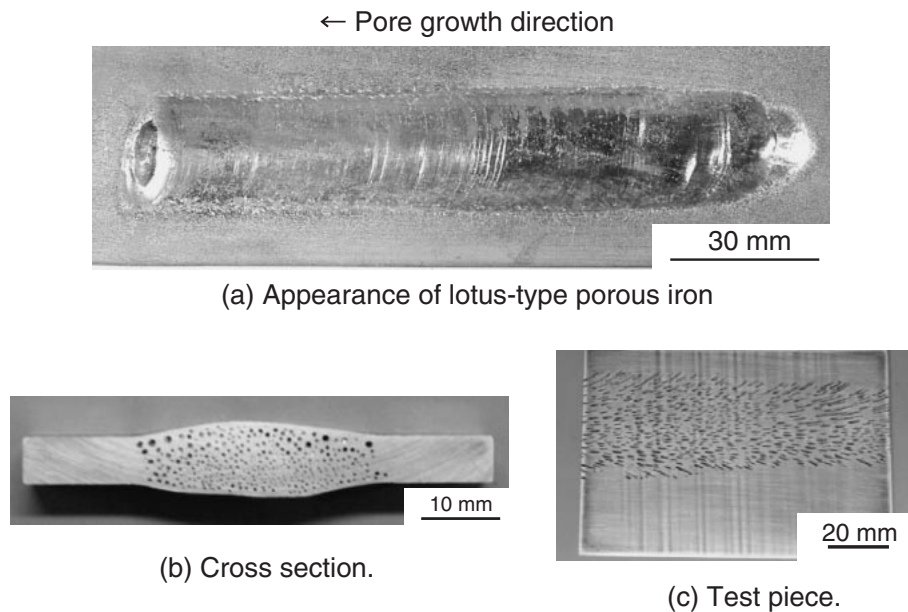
Appearance of the top view of the formed lotus-type porous iron prepared by the continuous zone melting technique (a), its cross section (b), and the test piece for laser welding (c).
